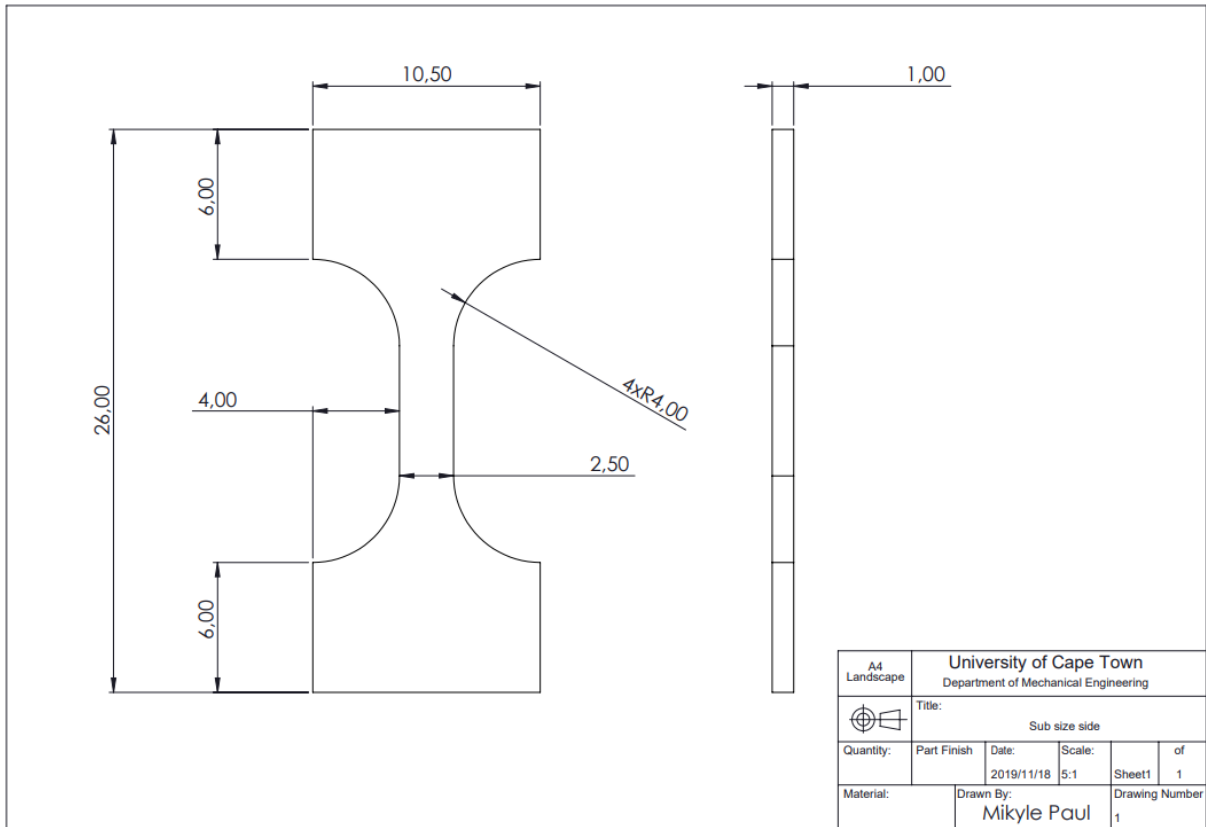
Drawing of mini tensile test specimen (dimensions in millimetres)
